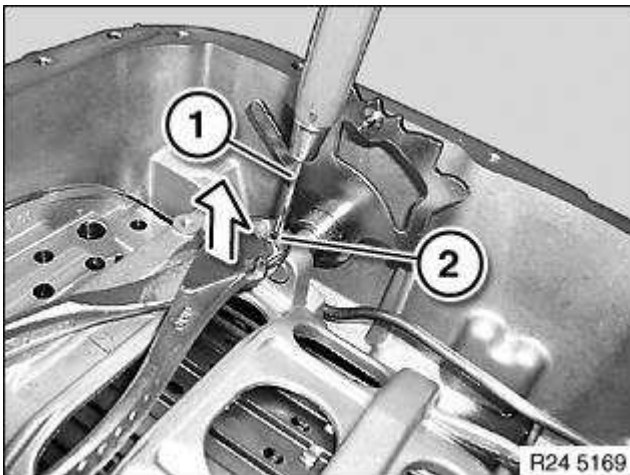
Grip Clamping Pin (2) With Side Nippers
